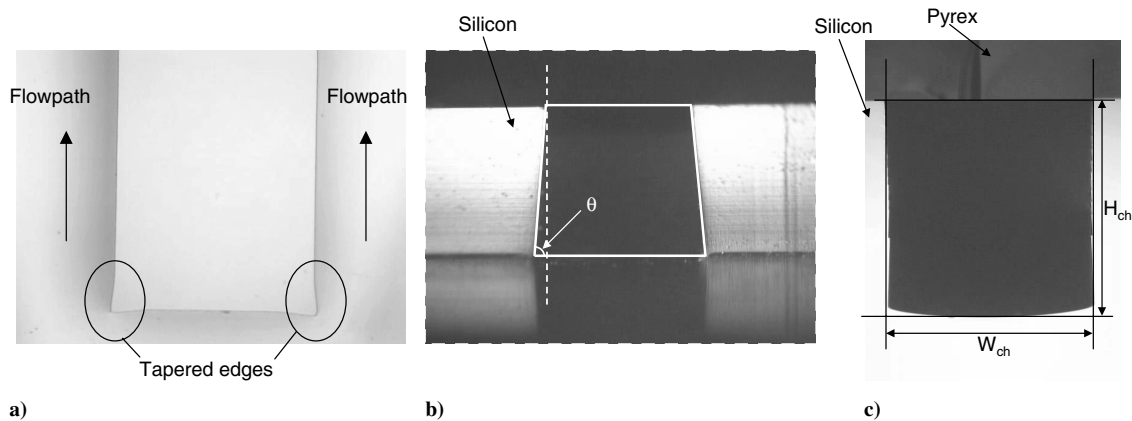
Channel inspection a) tapered edges, b) trapezoidal cross section at entry/exit, c) cross section in core.
